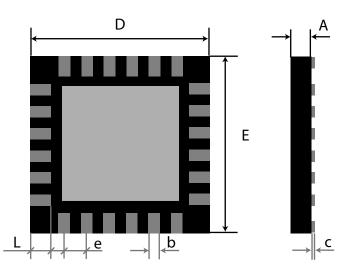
24-pin QFN Package Dimensions (viewed from bottom)
